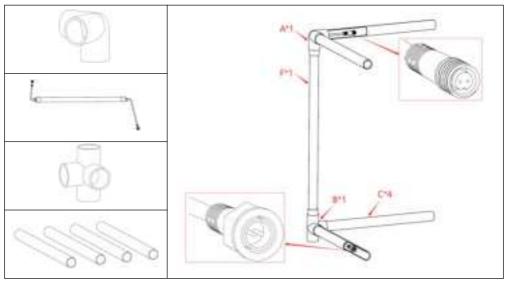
According to the figure, assemble four transverse tubes with length of 355MM, one 4-pass, one 3-pass and one lamp together for backup (Note: the lamp wire is in the outlet hole of 3-pass and 4-pass).
